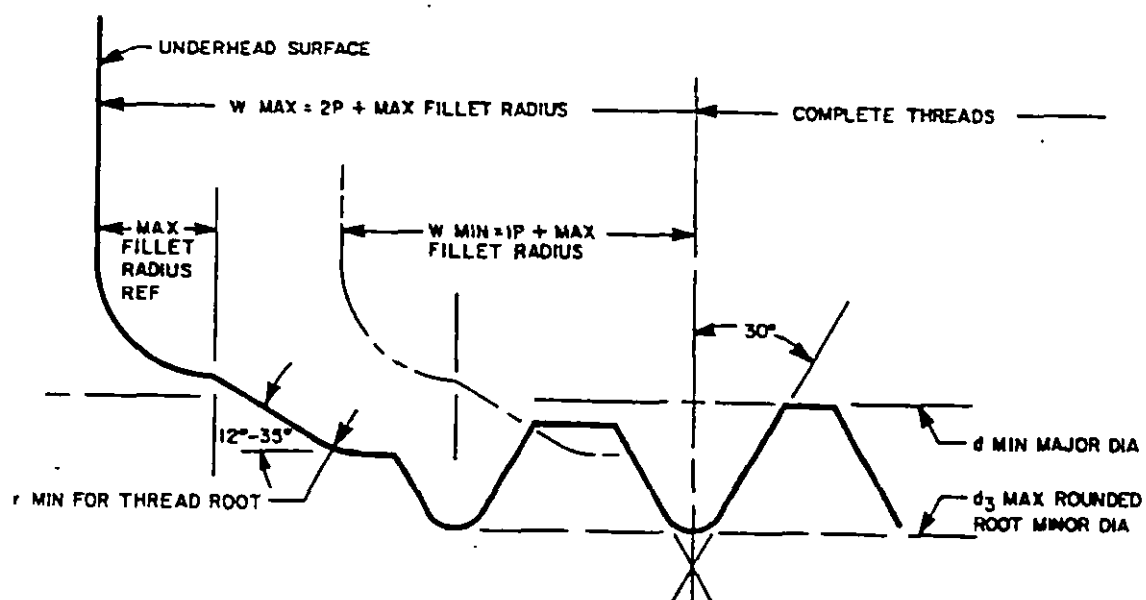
FULL SHANK FASTENER-THREADED TO HEAD
